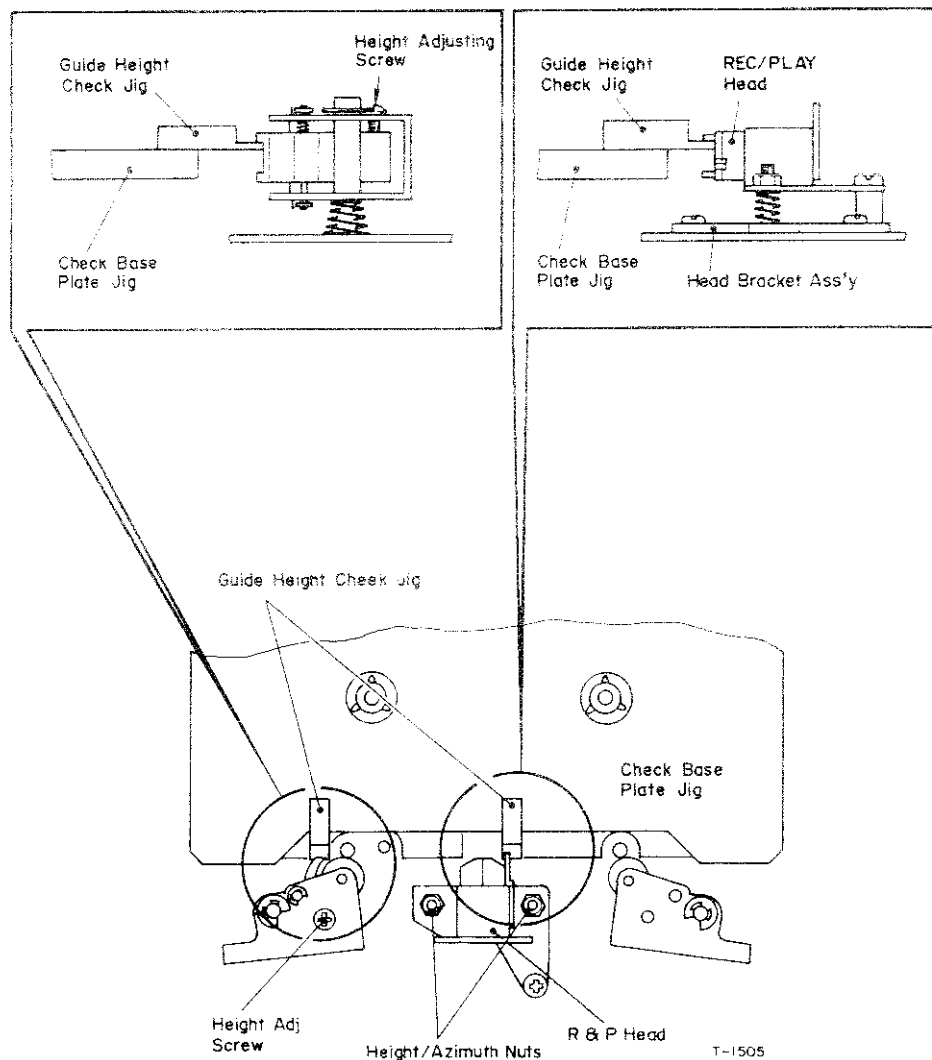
Adjusting Height of Pinch Roller Guide and REC & PLAY Head
